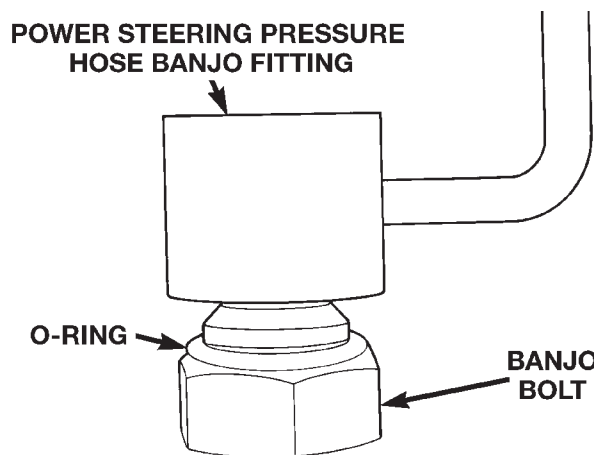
O-Ring Installed On Banjo Fitting Bolt
